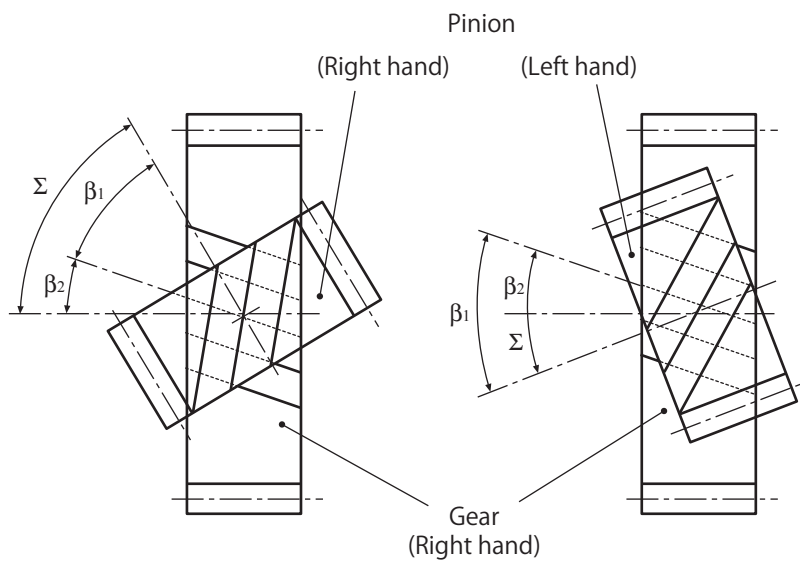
Engagement of Crossed helical gear (Screw gear)
